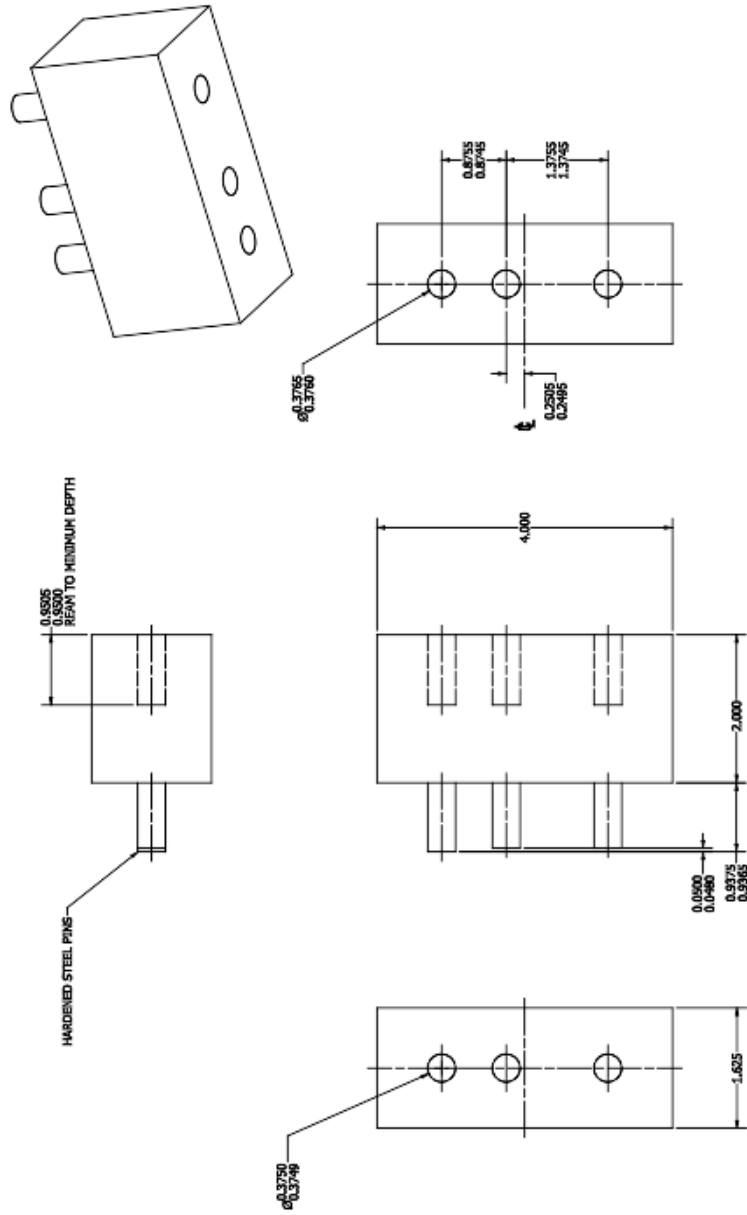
Pin and sleeve alignment test fixture - 60 ampere device (5T60)
